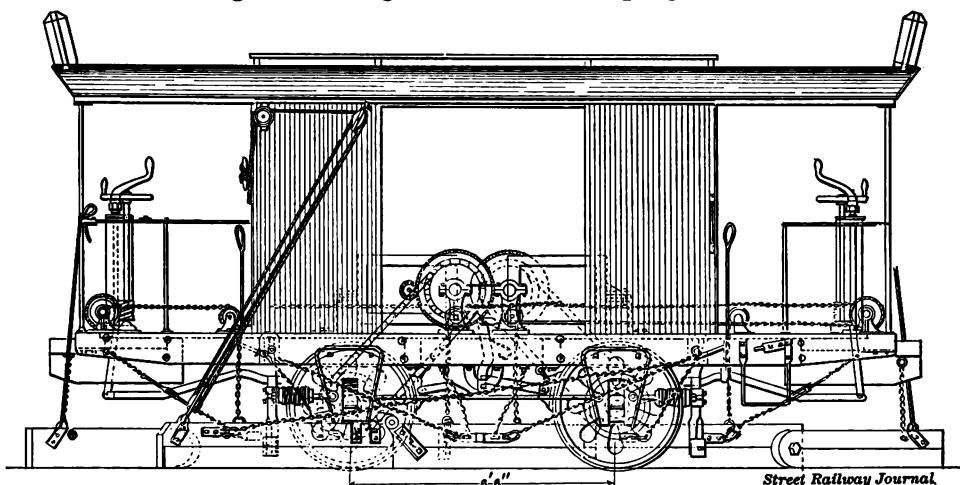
SIDE ELEVATION OF SNOW PLOW—BUFFALO STREET RAILWAY.
